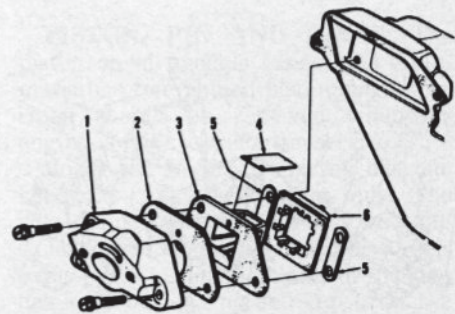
View showing reed valve and spacer installation used later in production than parts shown in Fig. HL2, but prior to installation shown in Fig. HL1.
